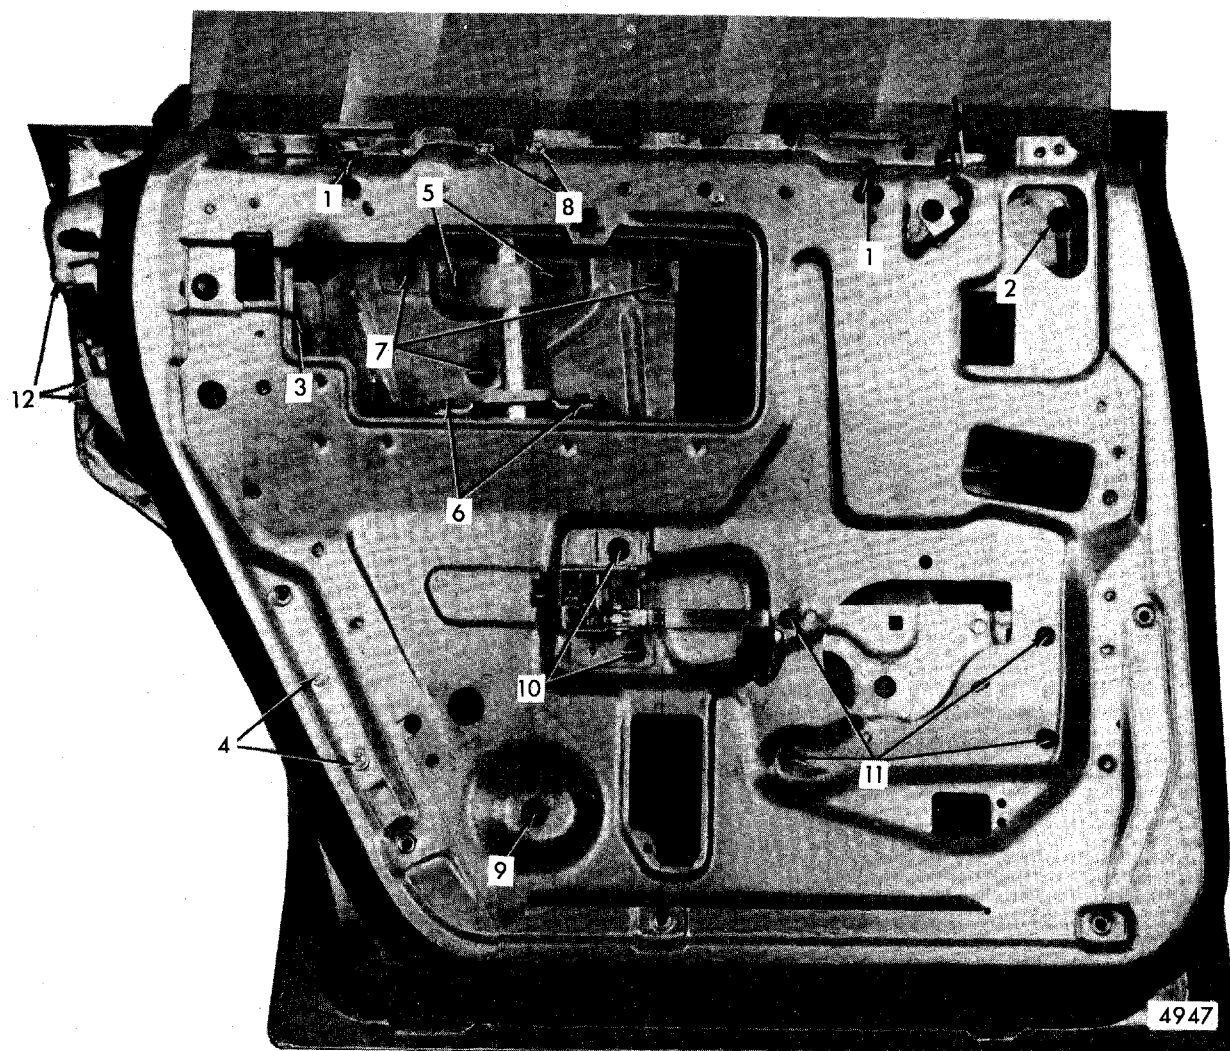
Rear Door Hardware Attachments - "A-29,35" Styles
